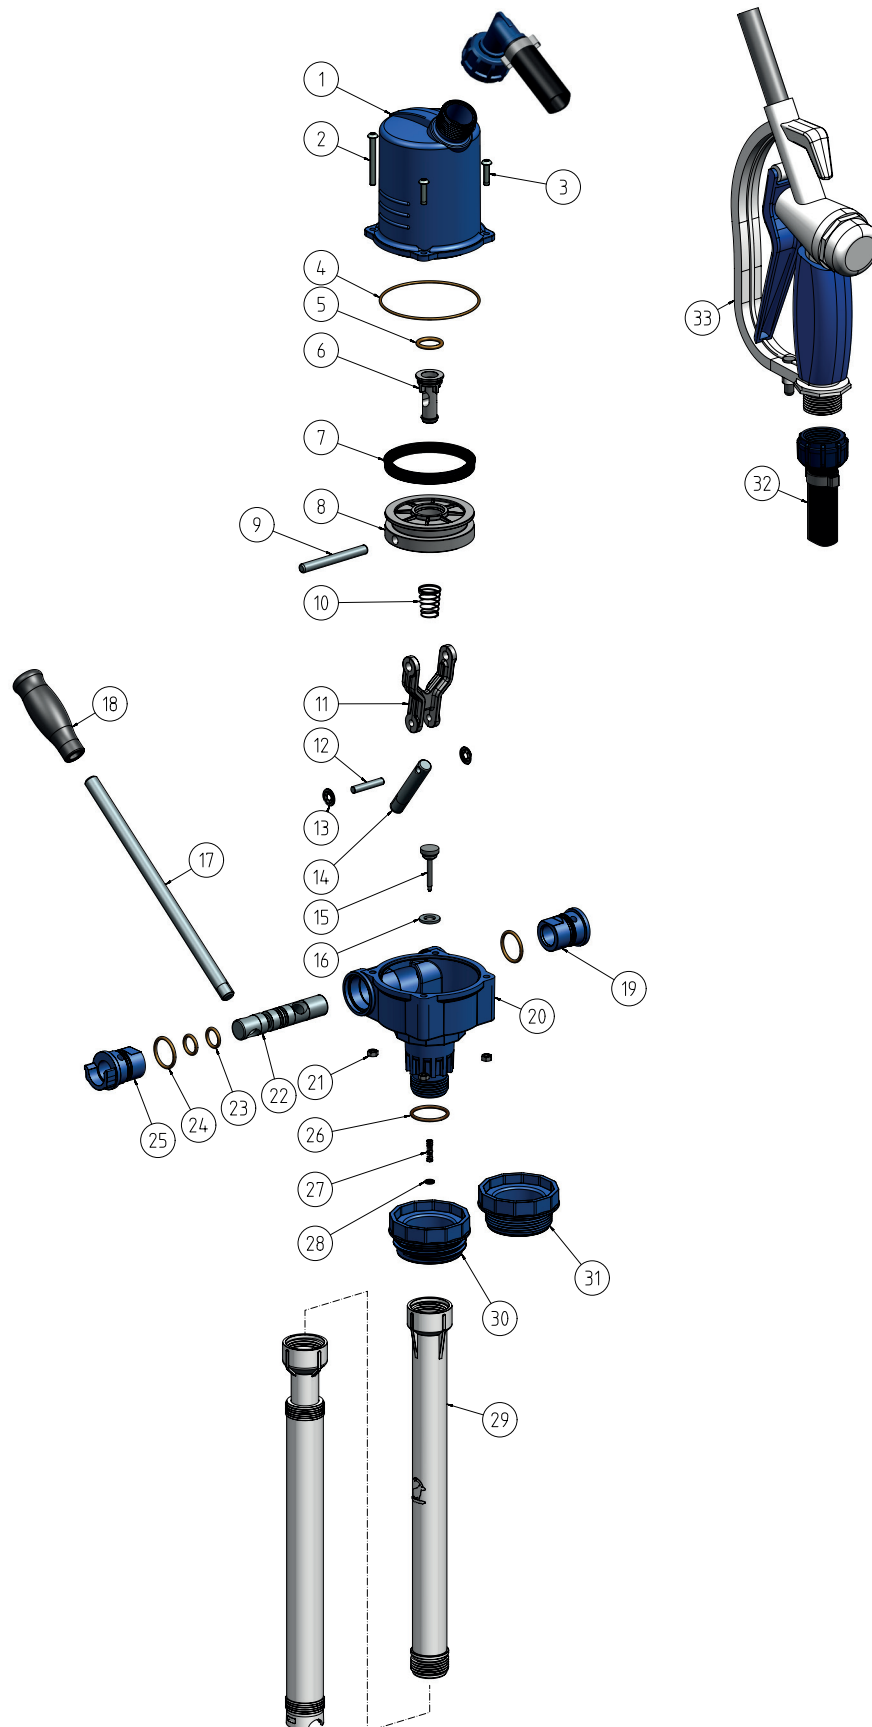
1: Exploded view of the barrel pump for urea (AdBlue®) with delivery hose and nozzle
